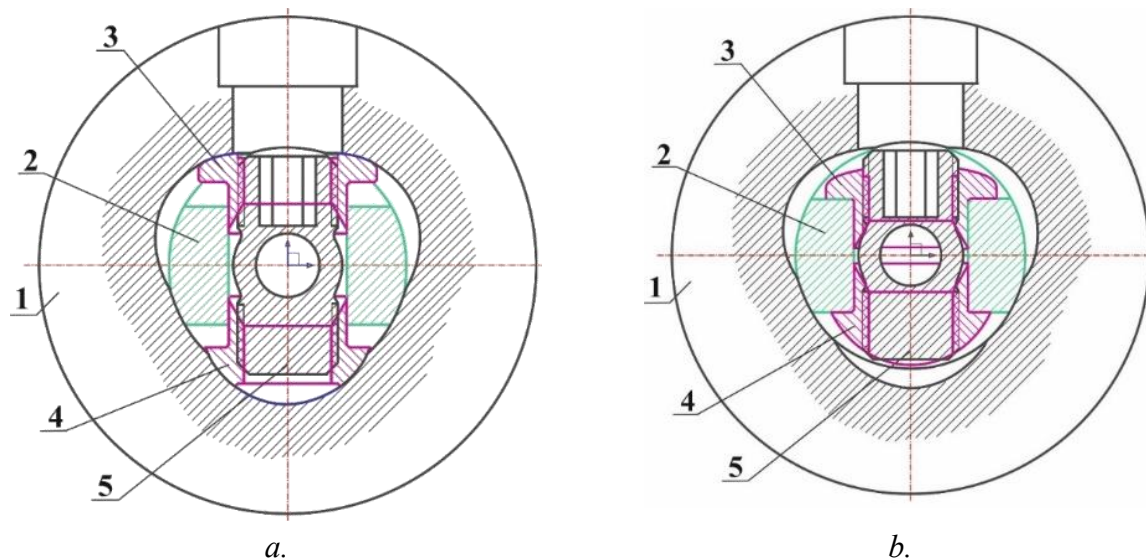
Scheme of a clamping mechanism for quick-change fastening of metal-cutting tools:
